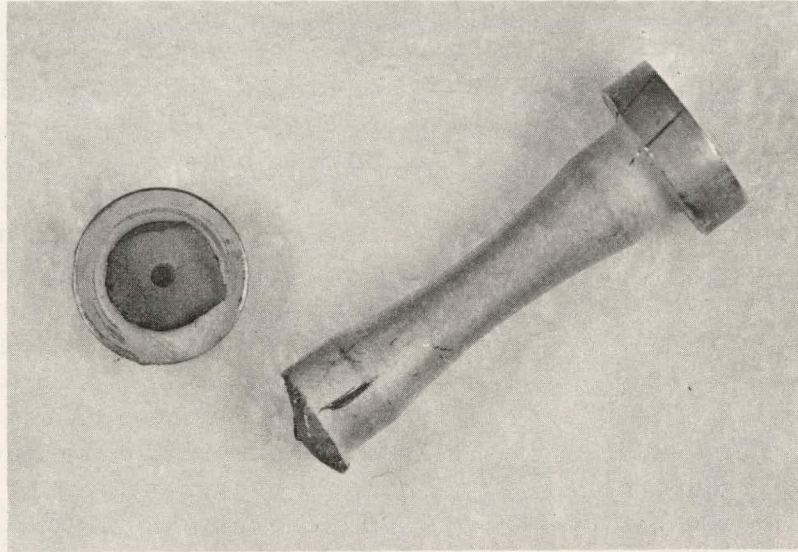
Shaped 4340 Specimen, Unirradiated, Charge A. Specimen broke under head in tensile test.
